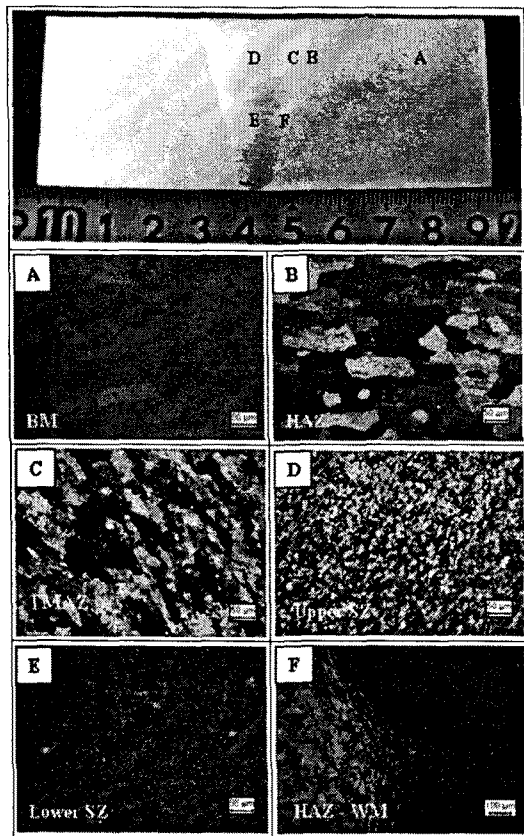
Macro and micro-structures of friction stir welded 2519Al-T87 (travel speed: 22mm/min)
